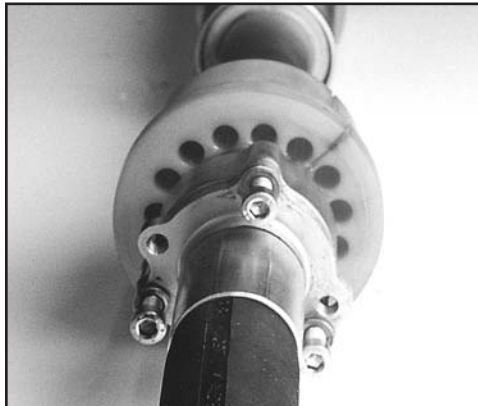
REMOVE 3 SOCKET HEAD CAP SCREWS
